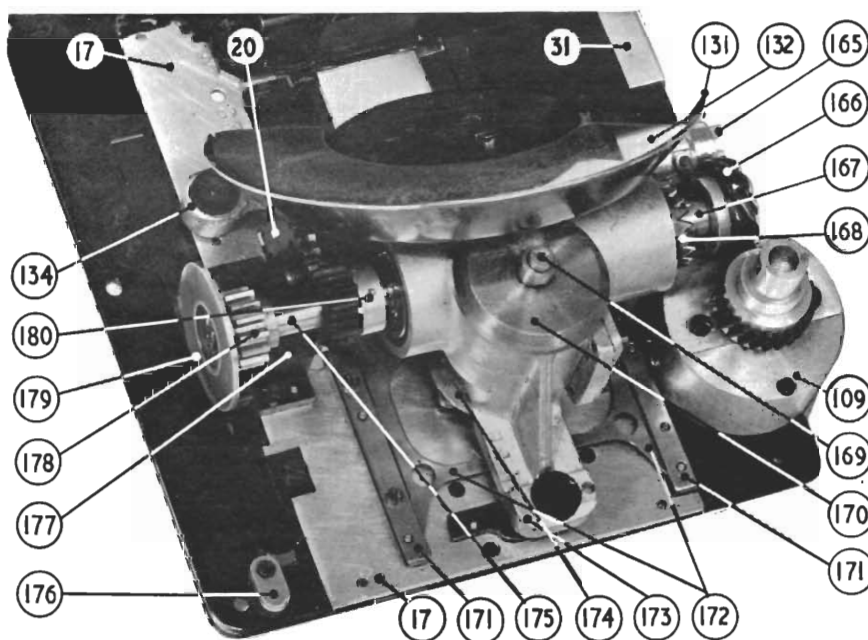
Assembly plate viewed from front, showing camera mechanism
